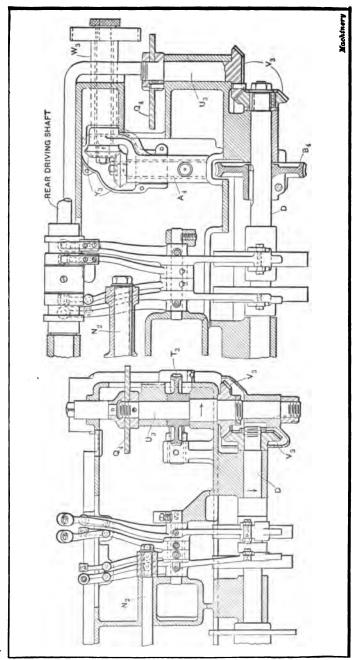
Partial Section showing how the Front and Lead Camshafts are operated on the No. 2 Machine
